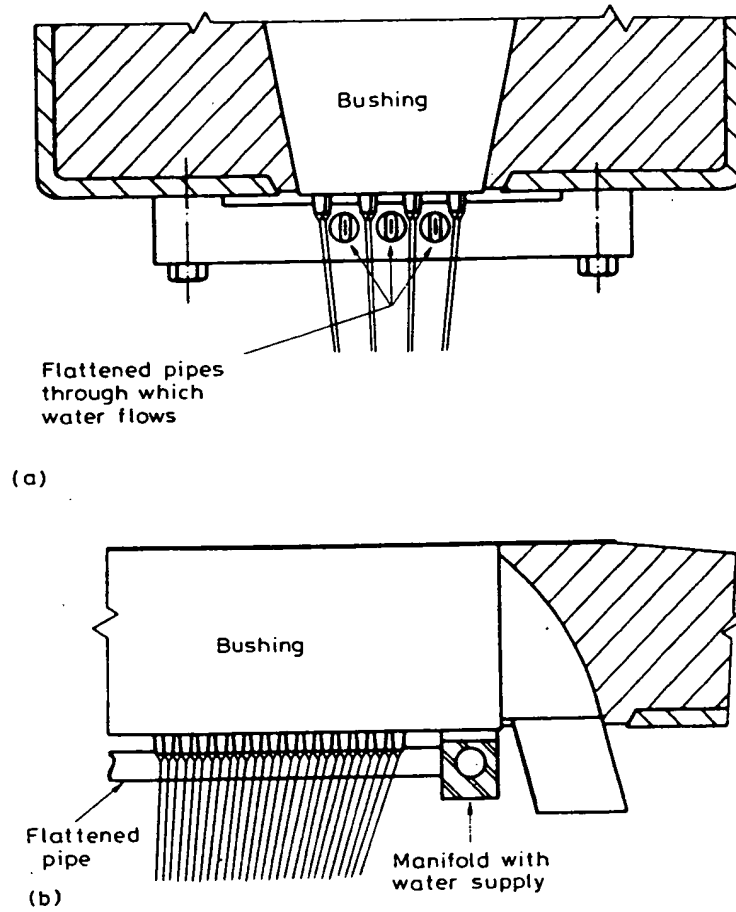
Longitudinal nozzle shields constructed from water-cooled flattened metal pipes welded at each end into a manifold which also provides the water supply. This arrangement avoids the risk of filaments touching the shields but also calls for a larger orifice plate and, therefore, a higher investment in platinum metals.
